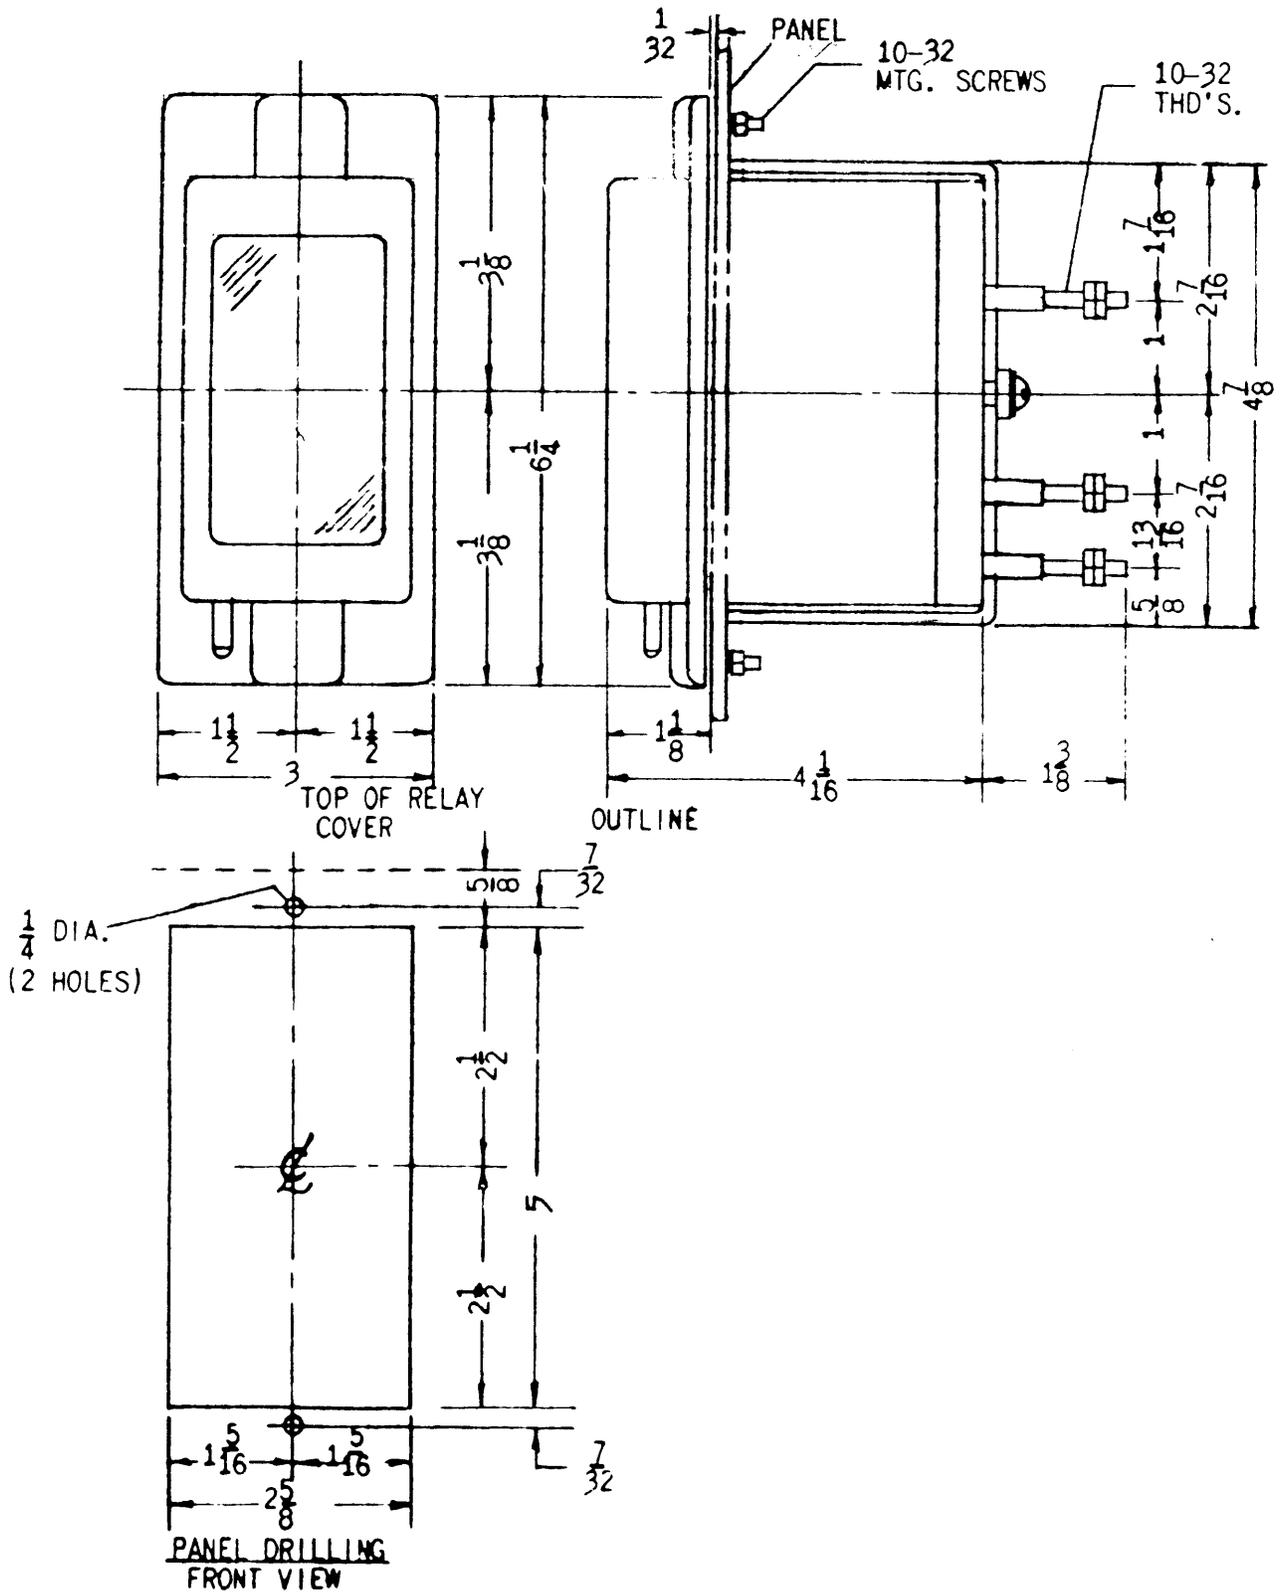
(0127A9555-3): HAA15A/15B/15C/15D/15H BACK CONNECTED SEMI-FLUSH MOUNTED OUTLINE AND PANEL DRILLING DIMENSIONS
